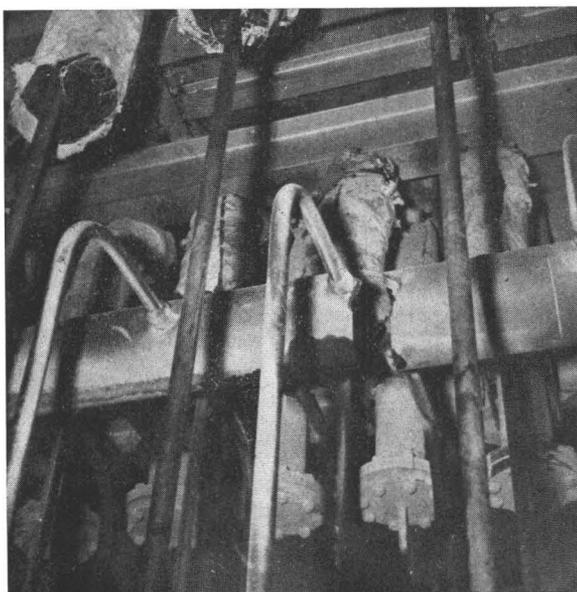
Thermal shock failure of reformer manifold in high carbon 37Ni 18Cr cast alloy due to water ingress following a boiler prime.
